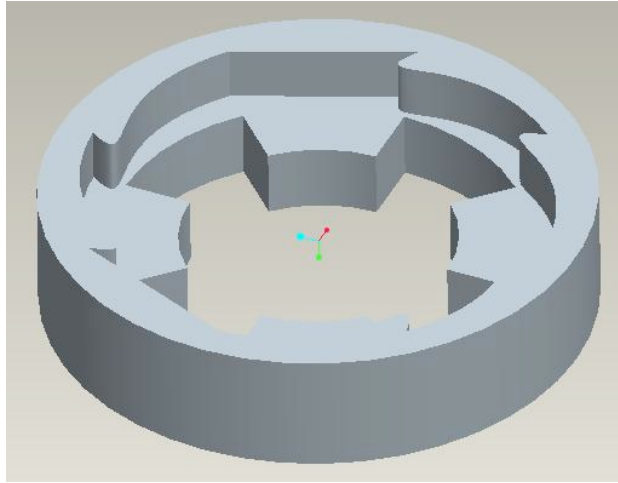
Laborer 1 will insert J2-2 (Wrapping disc) into the fixture first. The Laborer will then insert J2-1 (Ratcheting disc) on top of the wrapping disc. Then ultrasonic welding will be used to combine the parts. The combined parts are then removed from the fixture by turning it over and allowing the parts to fall out.
